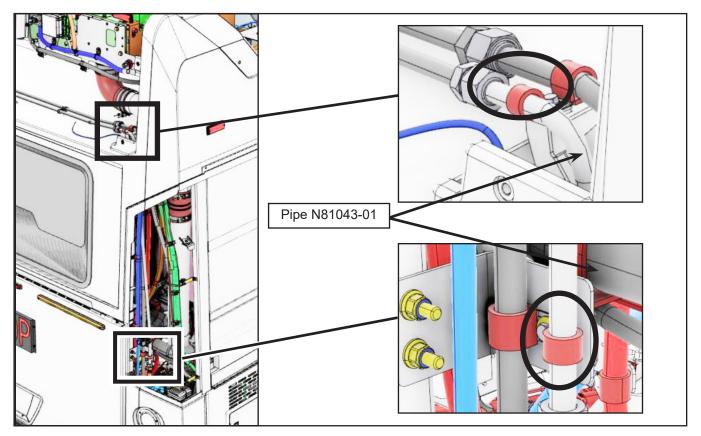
Remove P-Clamps to Free Pipe N81043-01
